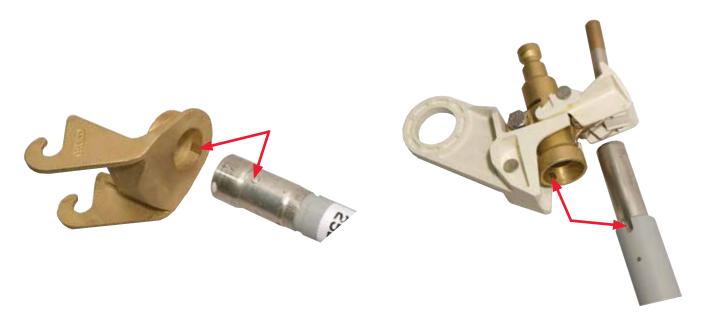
Federal Pacific's lower end-fitting trunnion casting has a guide slot that matches to the raised button on the fuse-unit lower-contact ferrule. The silencer/diffuser threads onto the trunnion casting.
